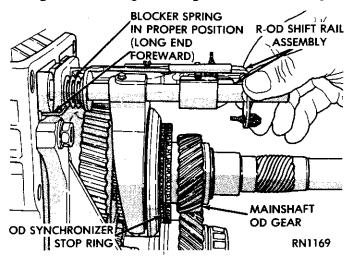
Reverse/OD Shift Rail And Blocker Spring Position
